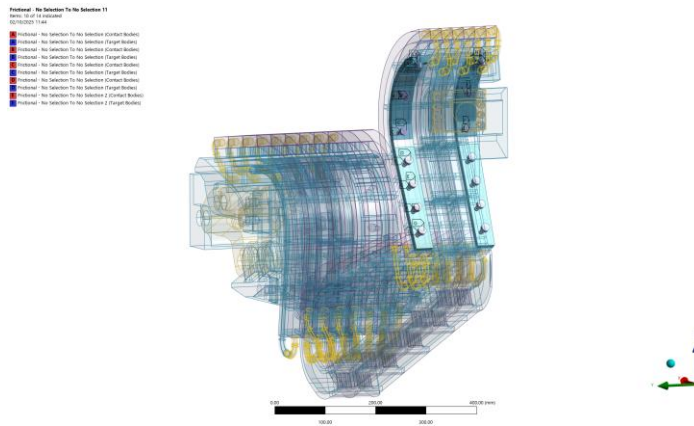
Frictional contacts between IVT connection screws heads and IVT back plate flanges
